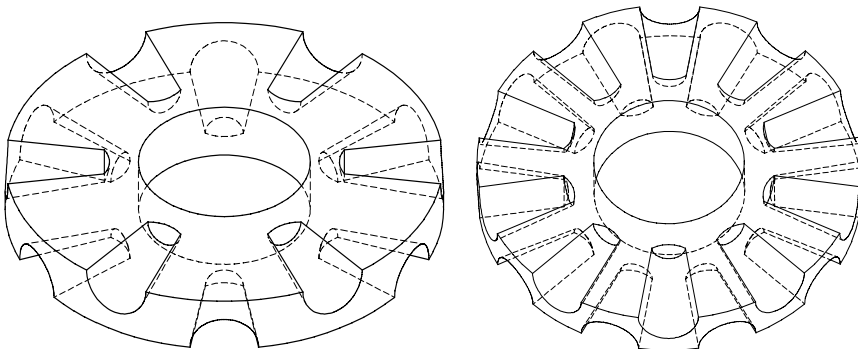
Grinding wheels with discontinuous cutting surfaces
